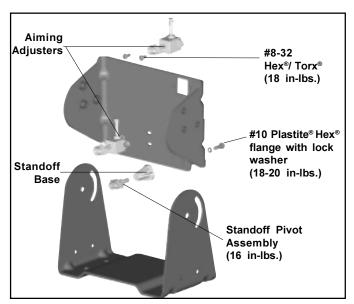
AIMING ADJUSTER REPLACEMENT KIT COMPONENTS
